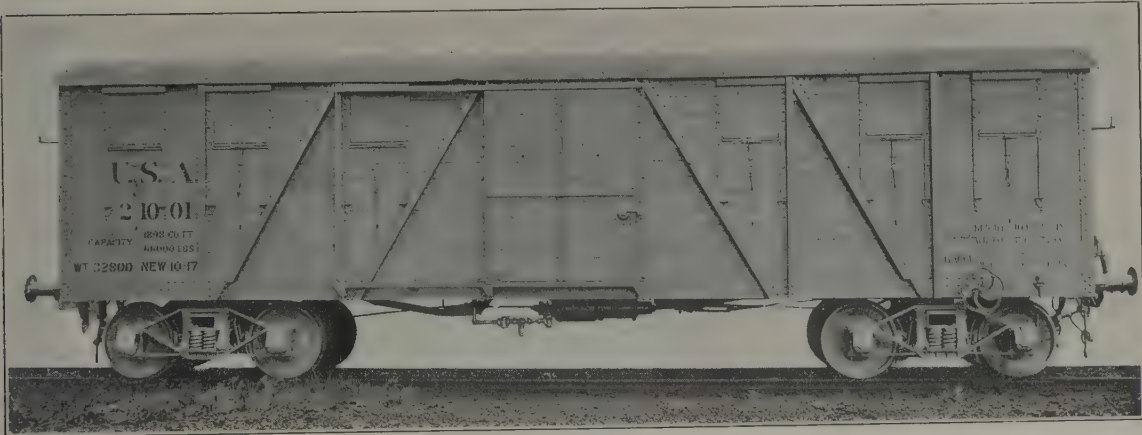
Steel Frame 33-Ton Box Car. Standard Gage; Sliding Doors; Air and Hand Brakes; Length over End Sills, 36 ft. 2¾ in.; Width over Side Sills, 8 ft. 3 5/16 in.; Weight, 32,800 lb. Built for American Expeditionary Forces.
